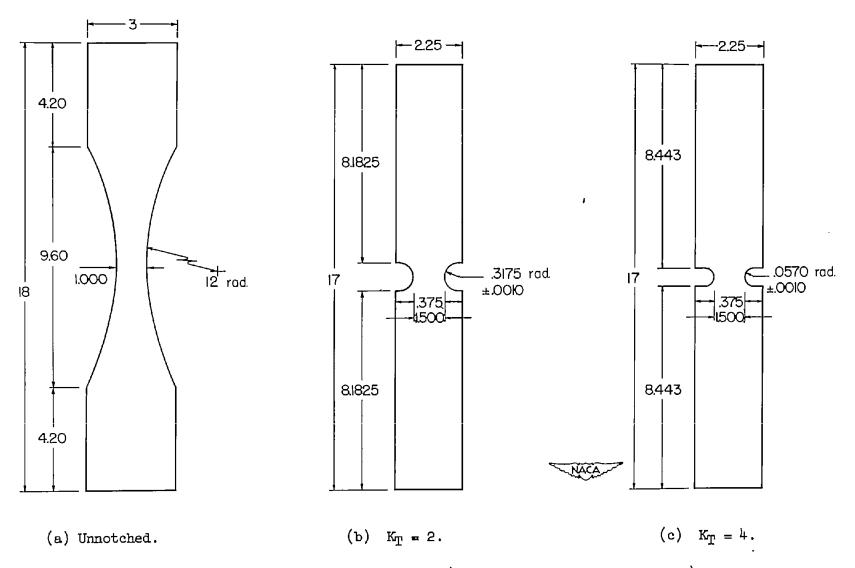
Specimen configurations. (All dimensions are in inches.)
